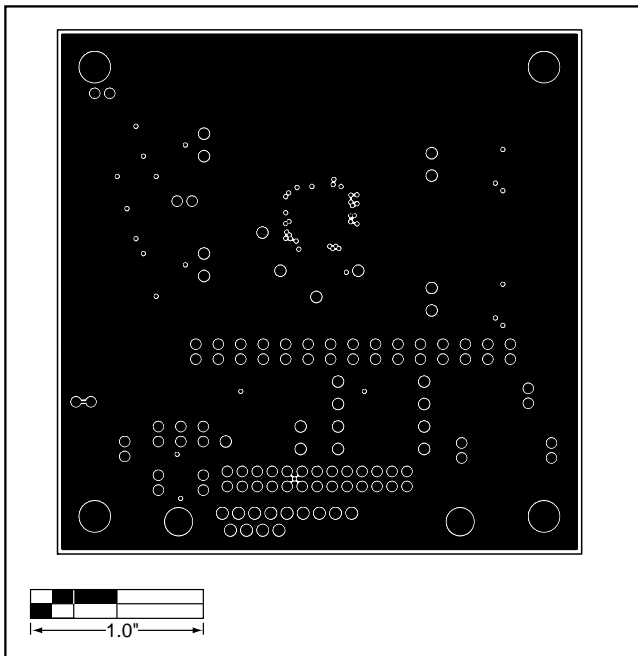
MAX2828/MAX2829 EV Kit PC Board Layout—Inner Layer 2
